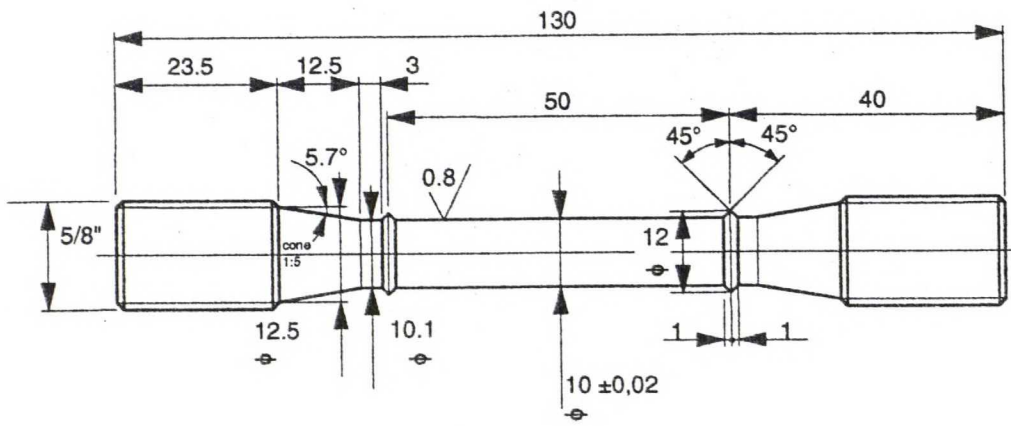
Round test specimen. Dimensions are in millimeters unless otherwise indicated.
